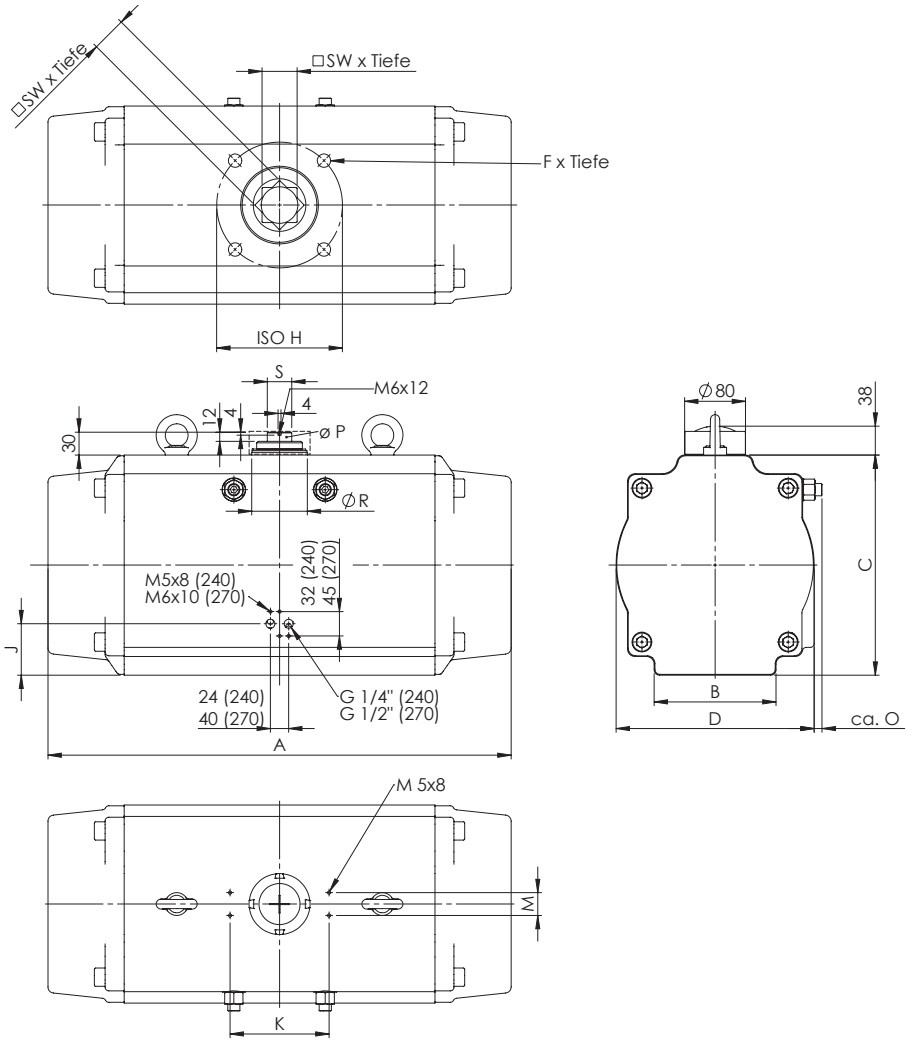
Dimensional drawings for type GDA/GSR-240 till 270
